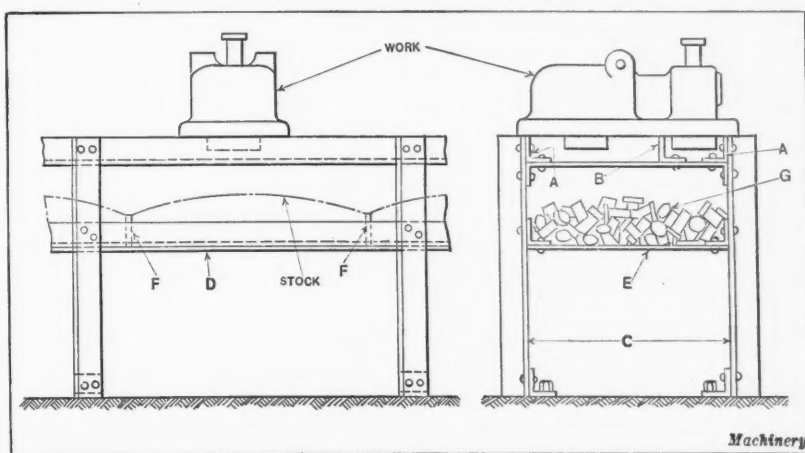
Plain Assembling Conveyor having Compartments for the Stowing of Parts
